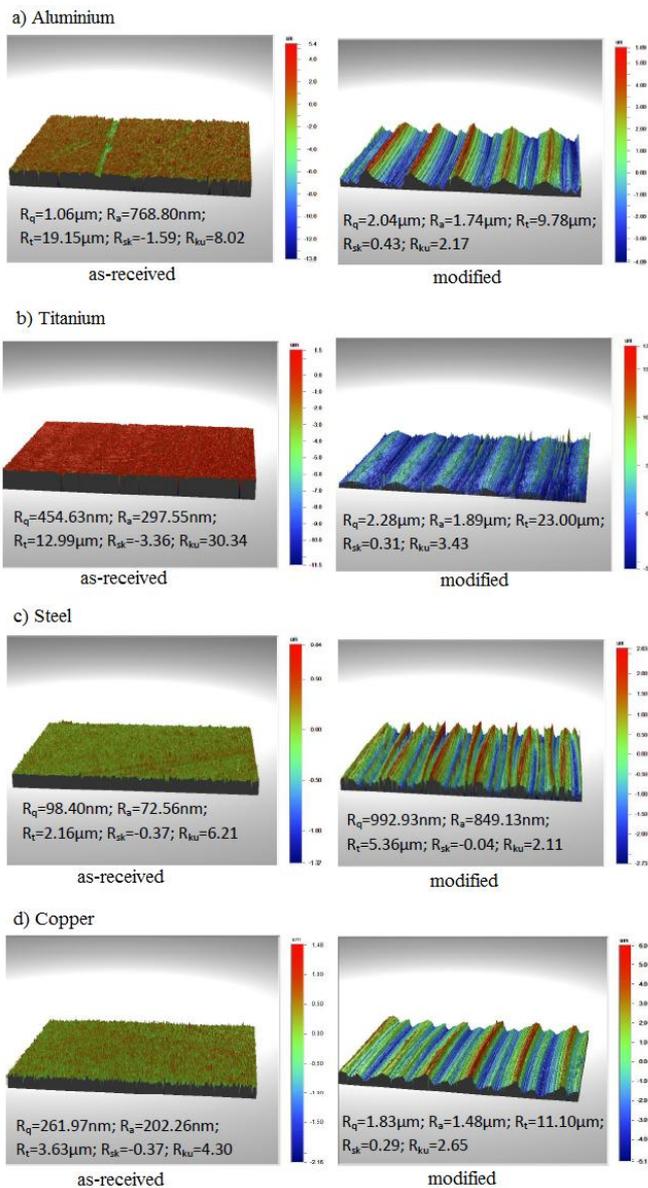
Surface topography of as received and mechanically milled surfaces.
